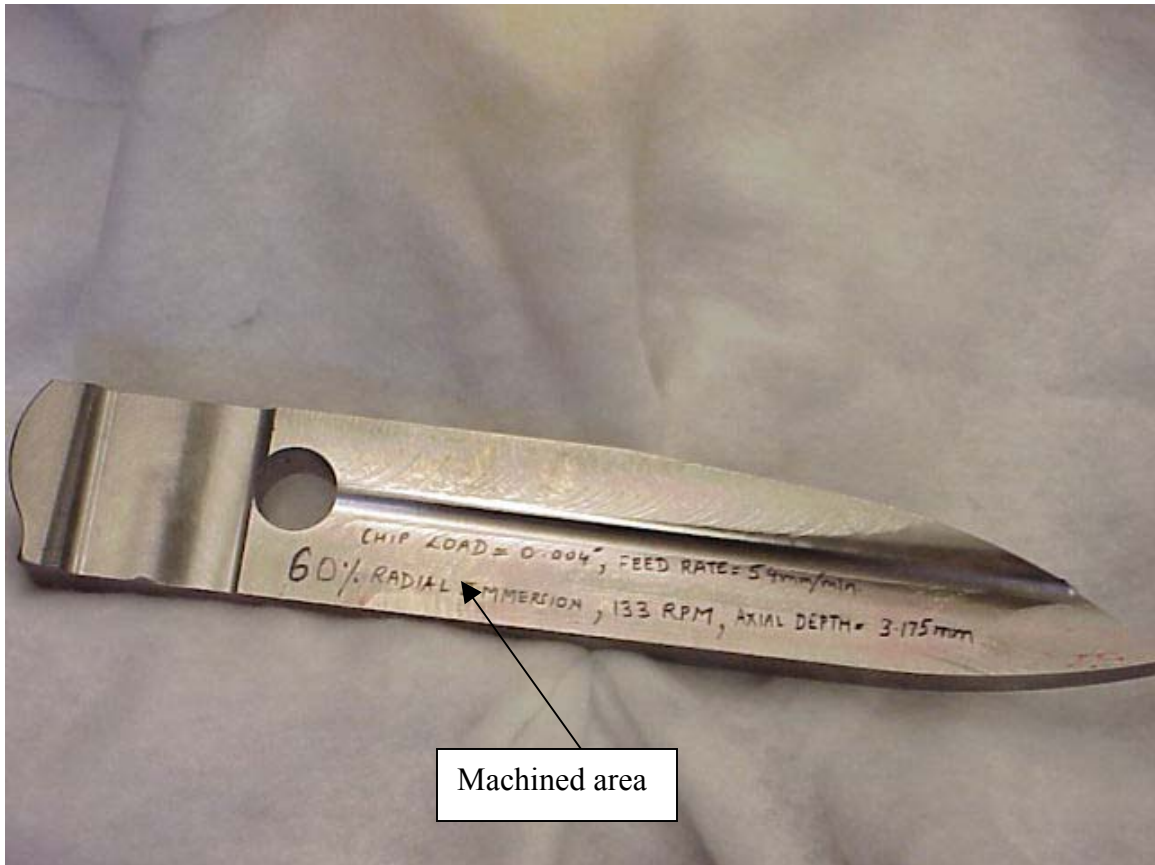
Workpiece machined using cutting parameters at MTRC given in Table 3-1 for a 60% radial immersion case
